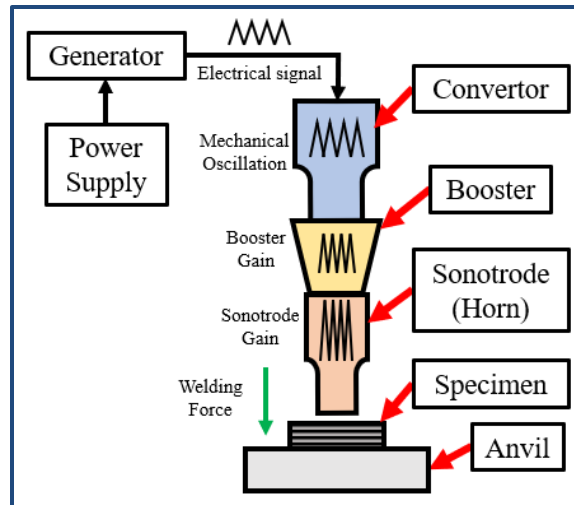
Schematic of an ultrasonic welding system and its major components
